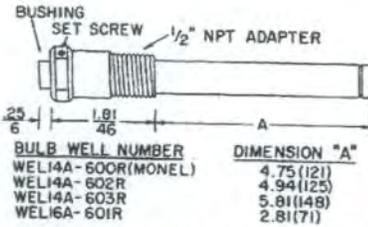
Bulb well for liquid immersion applications where a temperature bulb may be removed without draining tank.
